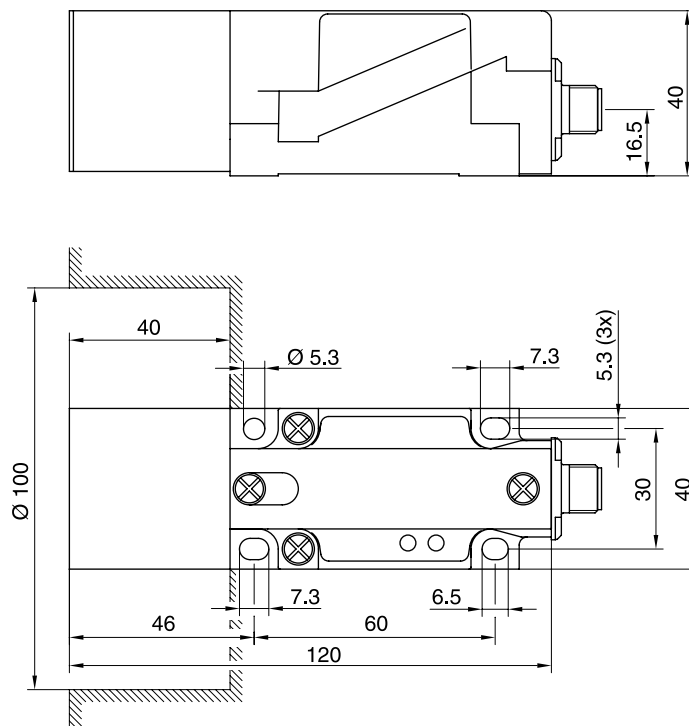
BIS L-400-043-001-02-S115 processor dimensions
